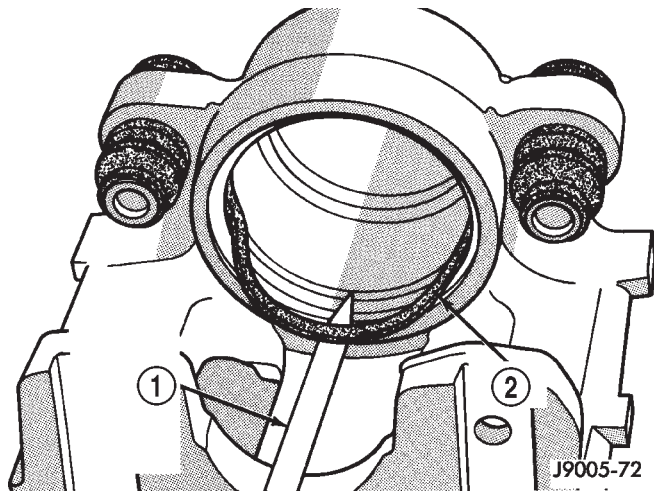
CALIPER PISTON DUST BOOT REMOVAL - TYPICAL
